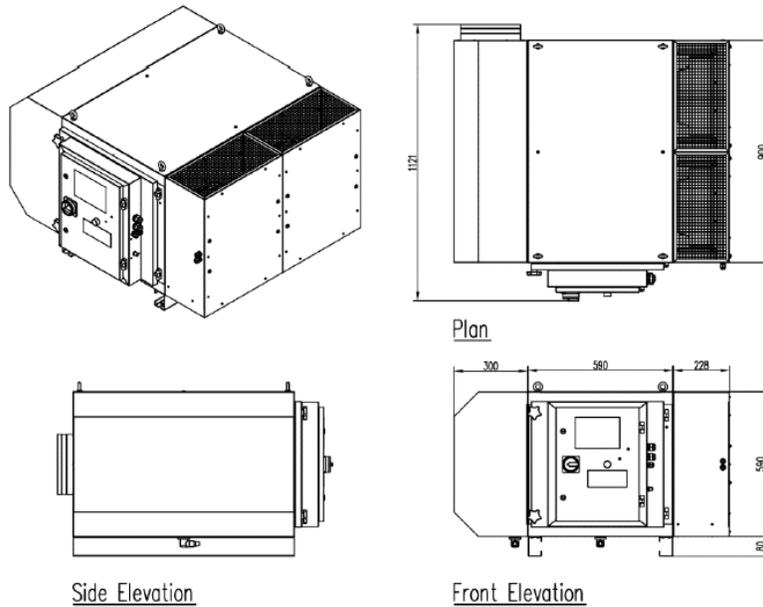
ESPi 4000 Dimensions (dimensions in millimetres)
